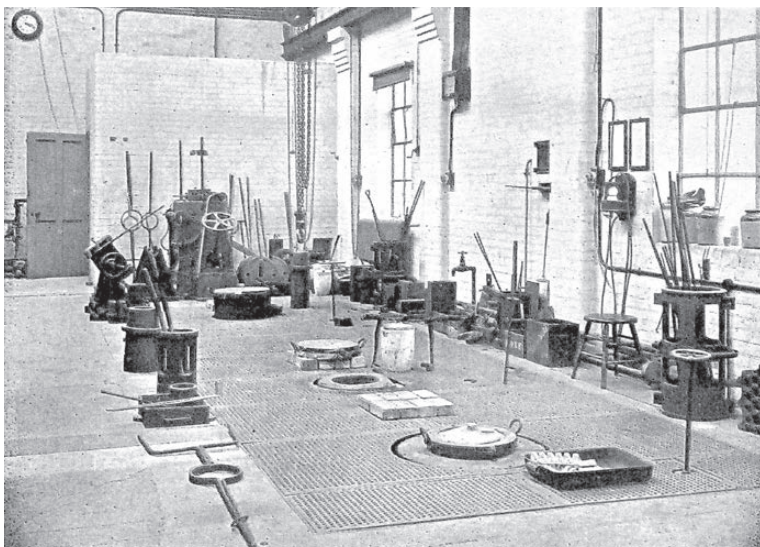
Experimental foundry and machine for combined clamping and cross tilting of slab molds at the National Physical Laboratory (NPL)⁹⁾.
